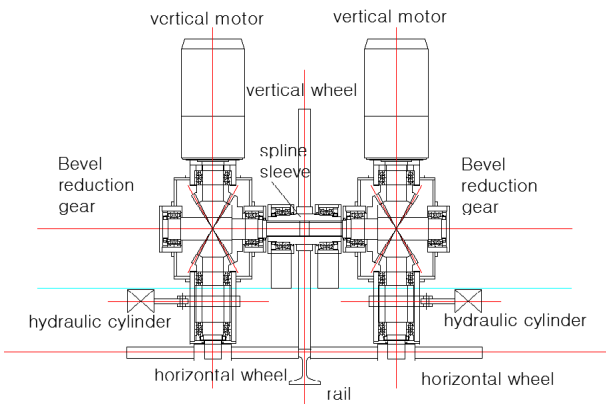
Arrangement of twin vertical motor with bevel gear reducer for wheel suspension system
